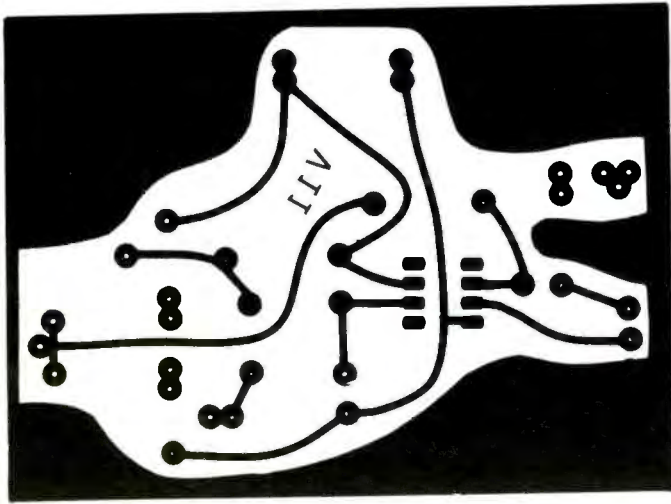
The actual-size etching-and-drilling guides (left) to use if you plan on fabricating your own pc boards.
